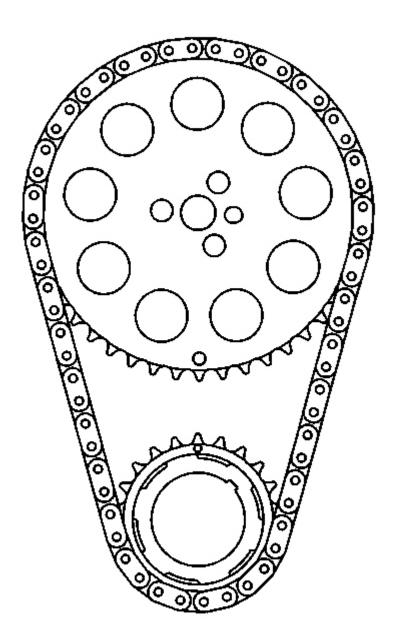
View Of Camshaft & Crankshaft Sprockets Timing Marks Aligned Courtesy of GENERAL MOTORS CORP.
